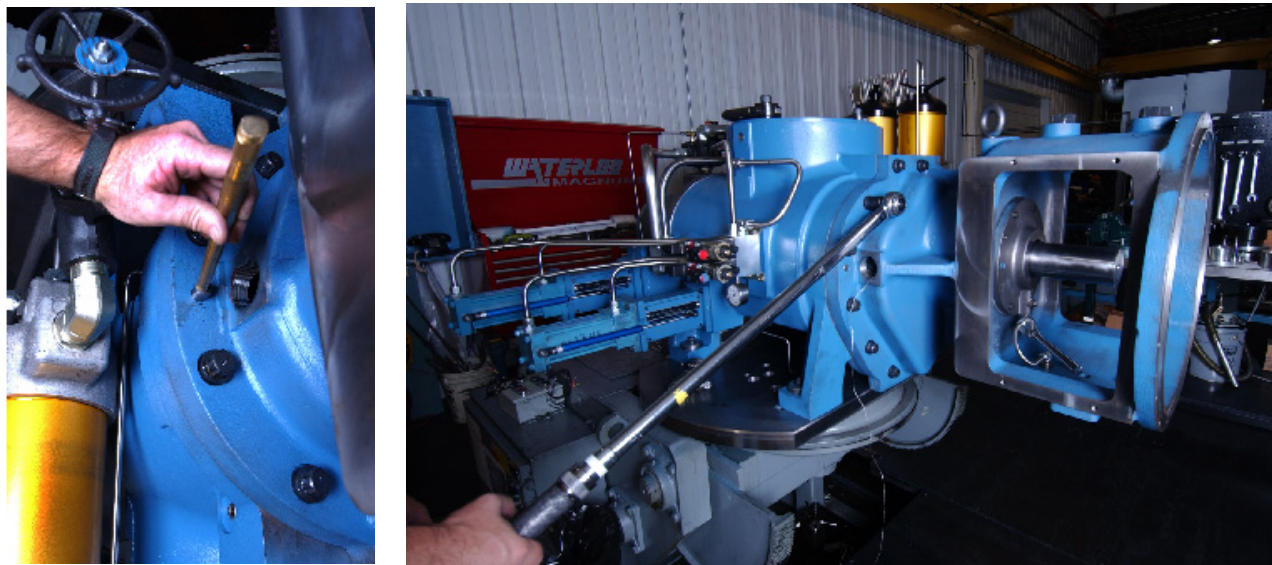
SETTING ALIGNMENT DOWELS & TIGHTENING BOLTING
